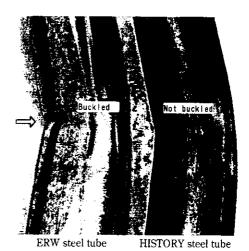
Appearance of bent tubes of ERW and HISTORY steel tube after draw bending without internal plug (bending conditions: $R = 150 \text{ mm} \times 20^{\circ}$)
